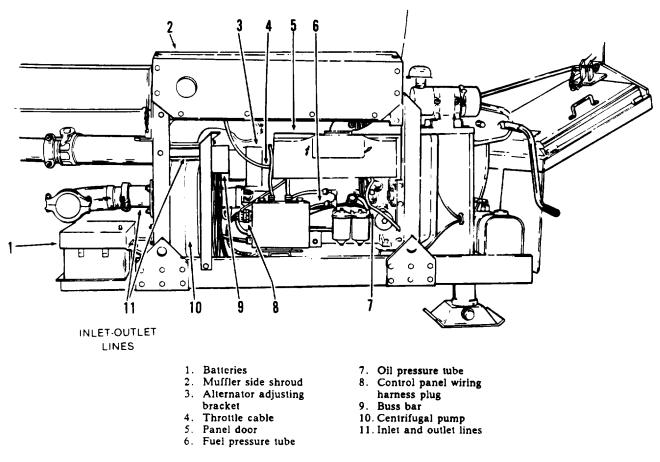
Engine and Pump Assembly Installed on Semitrailer.
